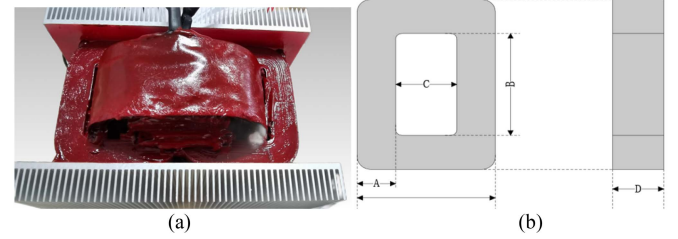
Shell-type HFT Physical Drawing. (a) HFT physical prototype. (b) Core dimensions.
